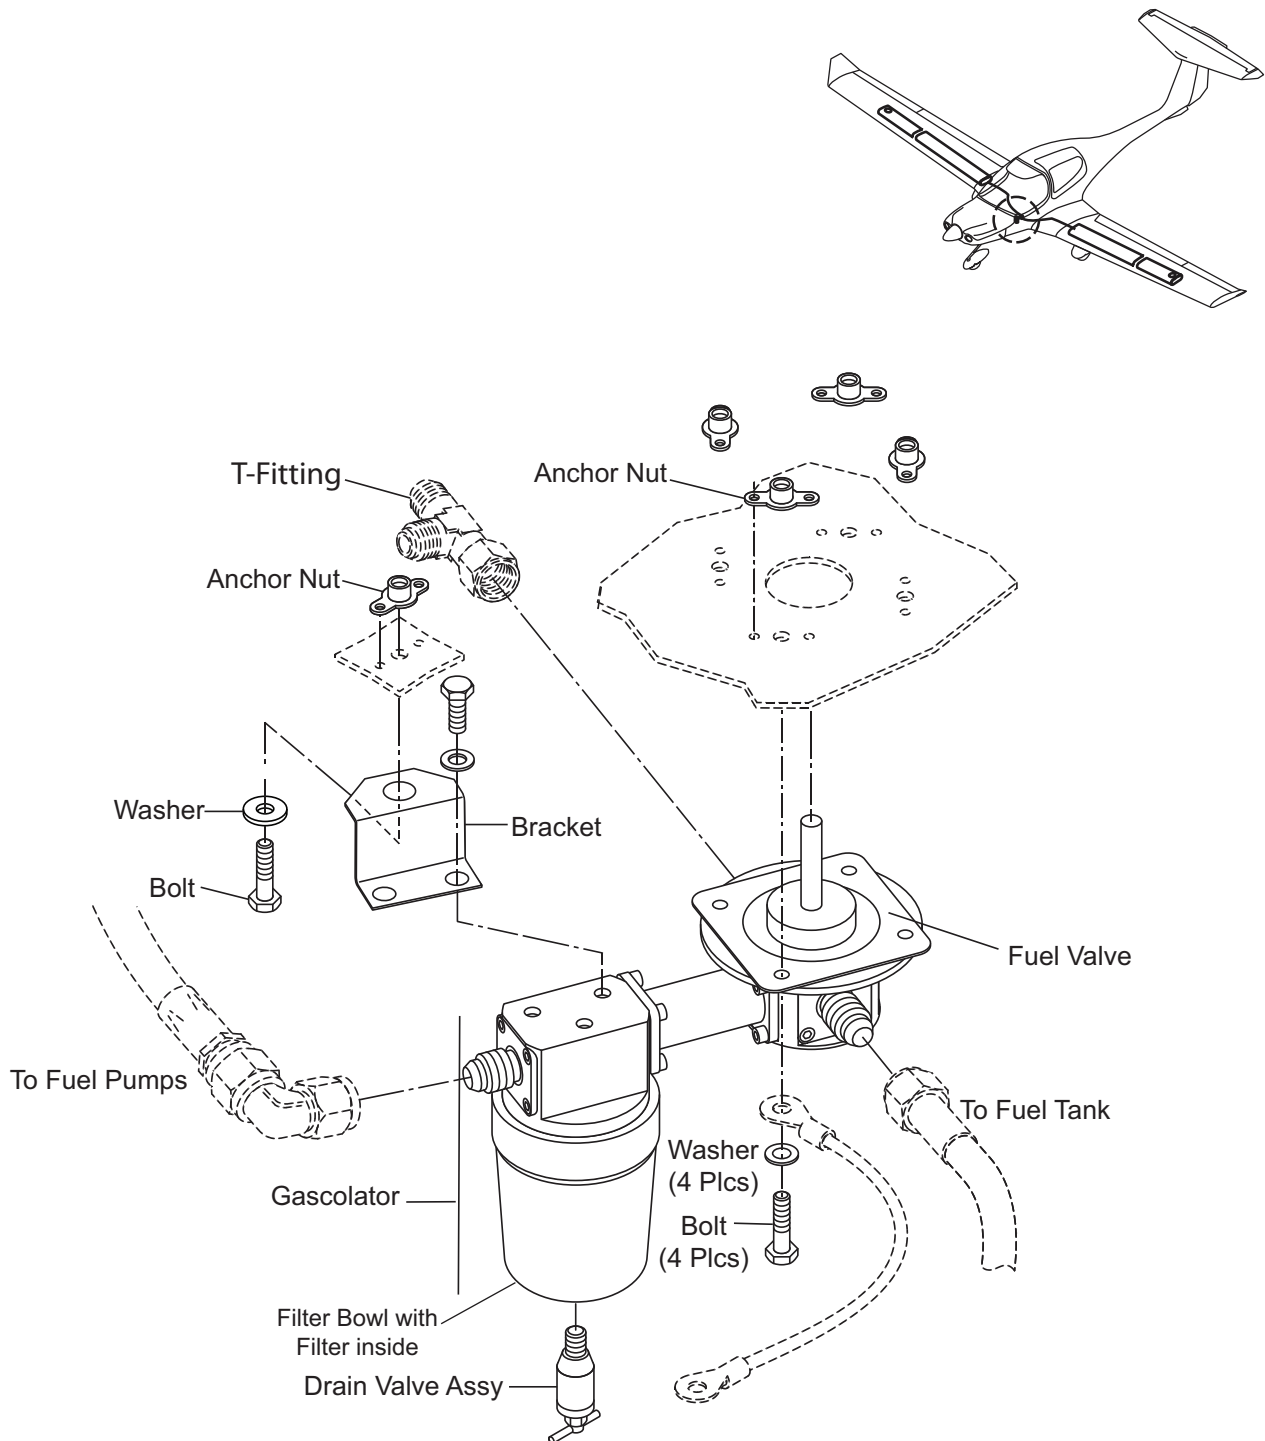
Fuel Valve and Gascolator - Removal/Installation
